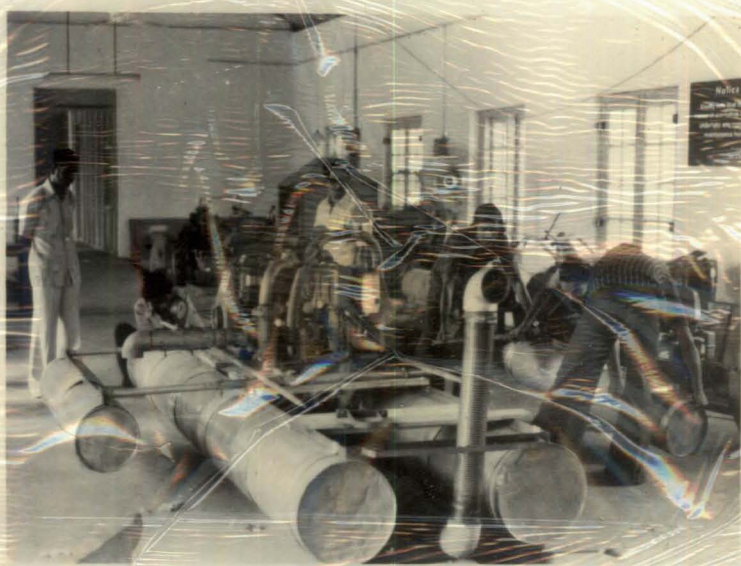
PROTOTYPE SALVINIA HARVESTING MACHINE WITH
